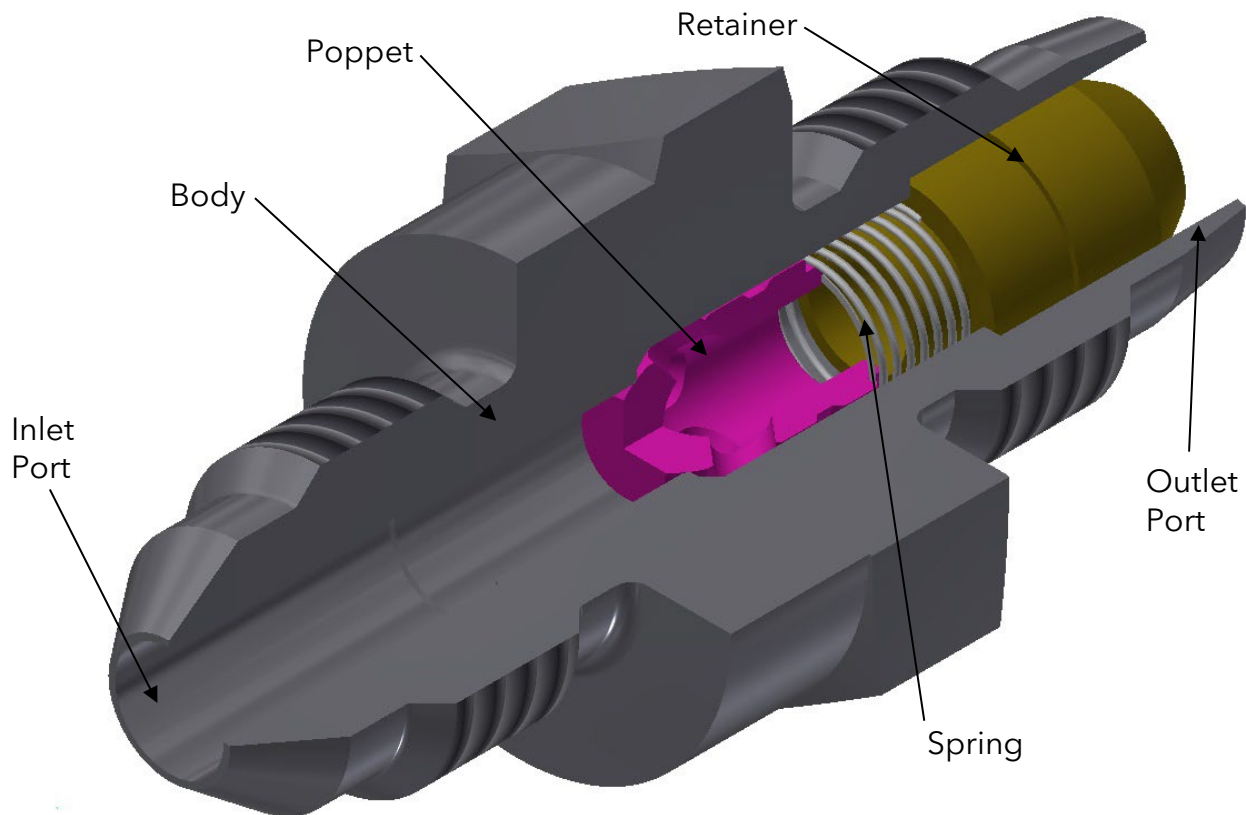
Shimmy damper check valve internal view. (Courtesy of Crissair, Inc.)
